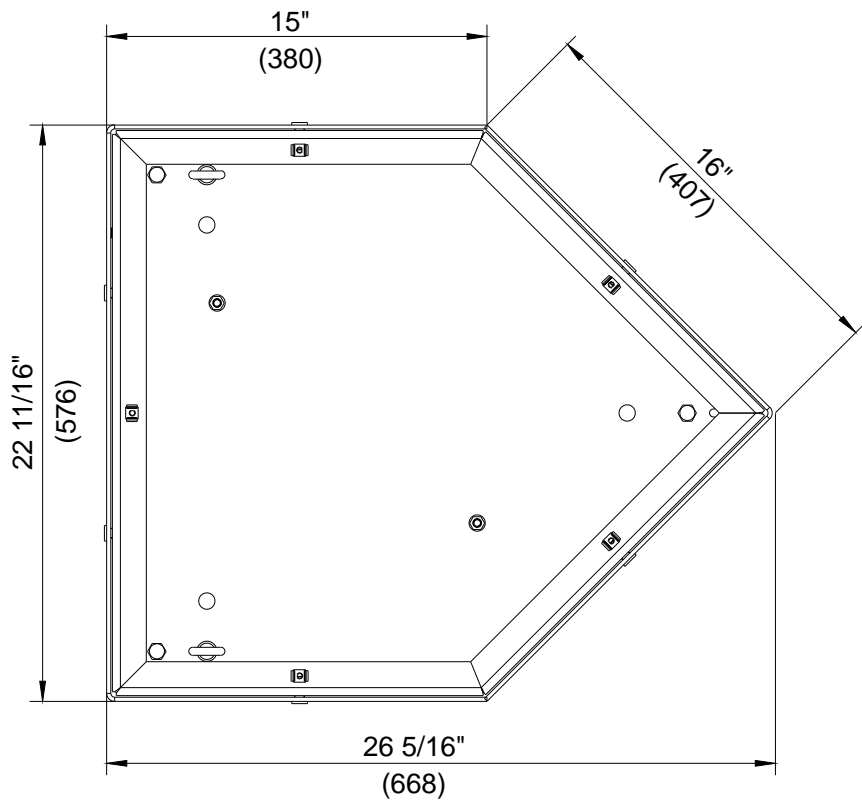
External Dimensions for 12" Floor Box, Top View
